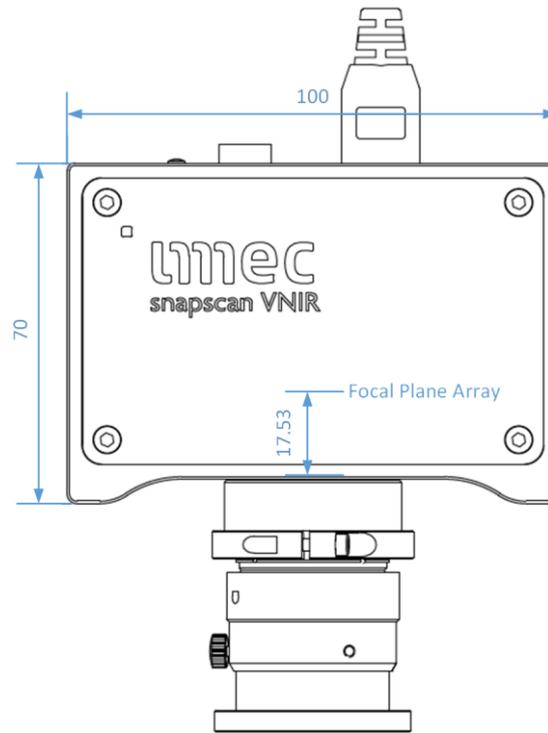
Flange focal distance, i.e. distance between the image sensor and the lens mount (all dimensions are in millimeter)
